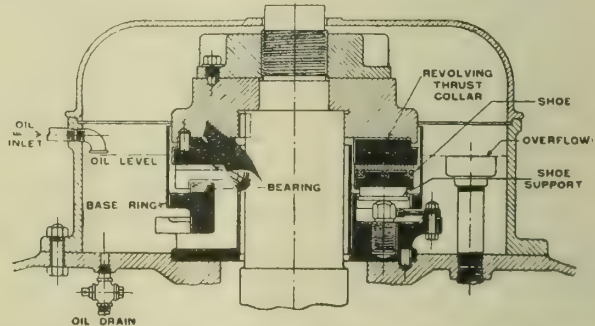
Kingsbury Thrust Bearing. Designed for 180,000 lb. thrust load at 100 r.p.m. Outside Diam. of Thrust Collar 31 inches.
